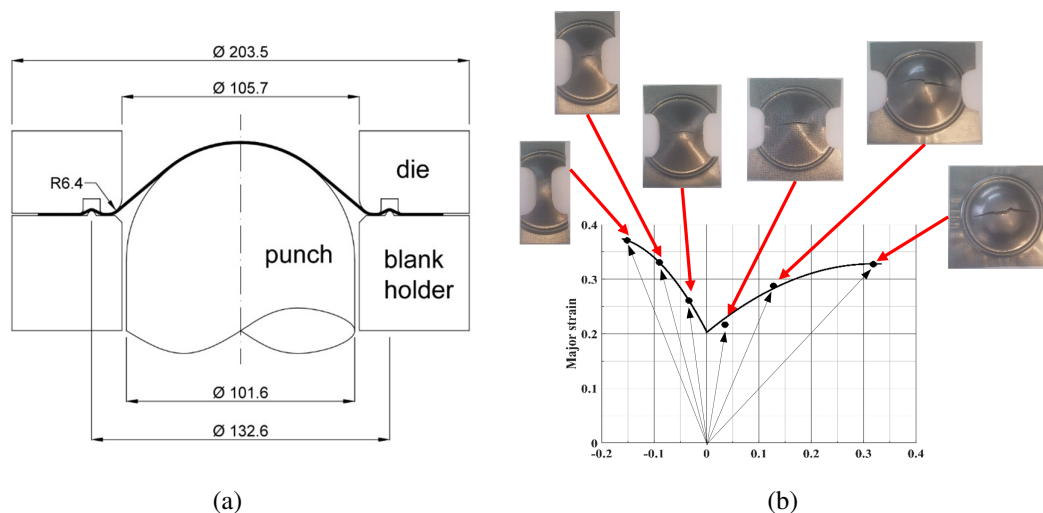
(a) Tool dimensions and FLD setup used in Nakajima tests; (b) Obtained FLC points for different specimen widths.
